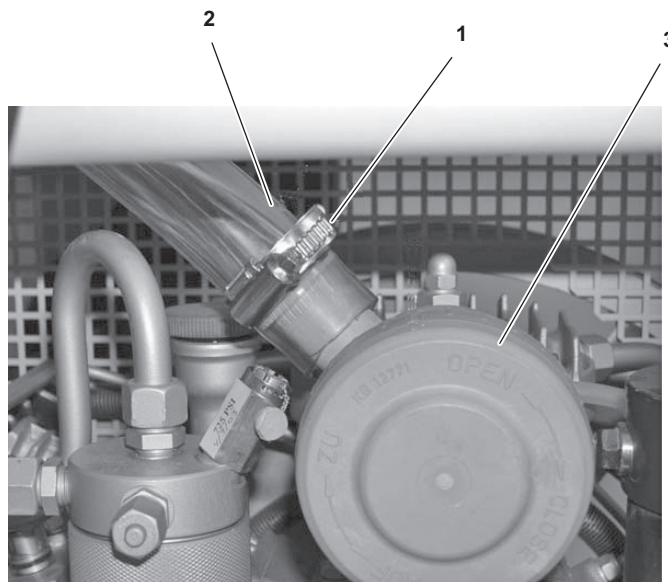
Air Inlet Hose, Hose Clamp, and Air Filter Housing
